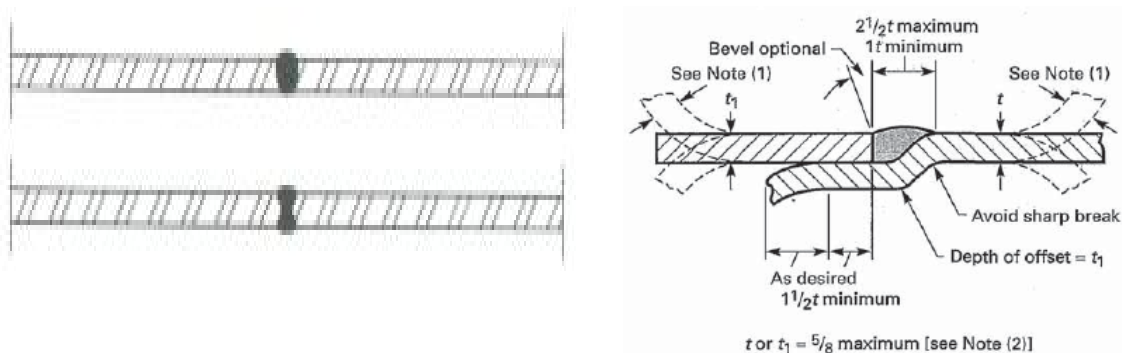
, b: Helical Butt Weld, Helical Offset Lap Weld (ASME 2007)
